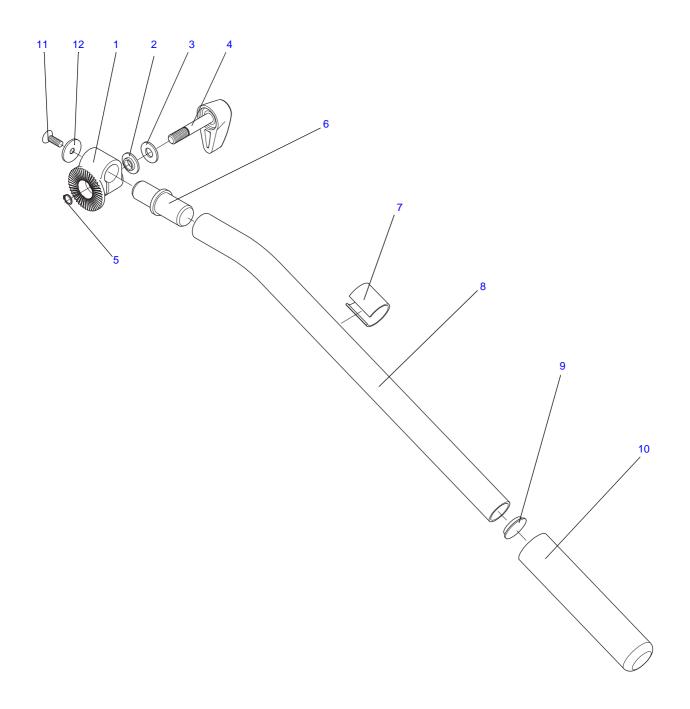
Vision 8 (Black) Pan and Tilt Head - Pan Bar Unit Assembly
